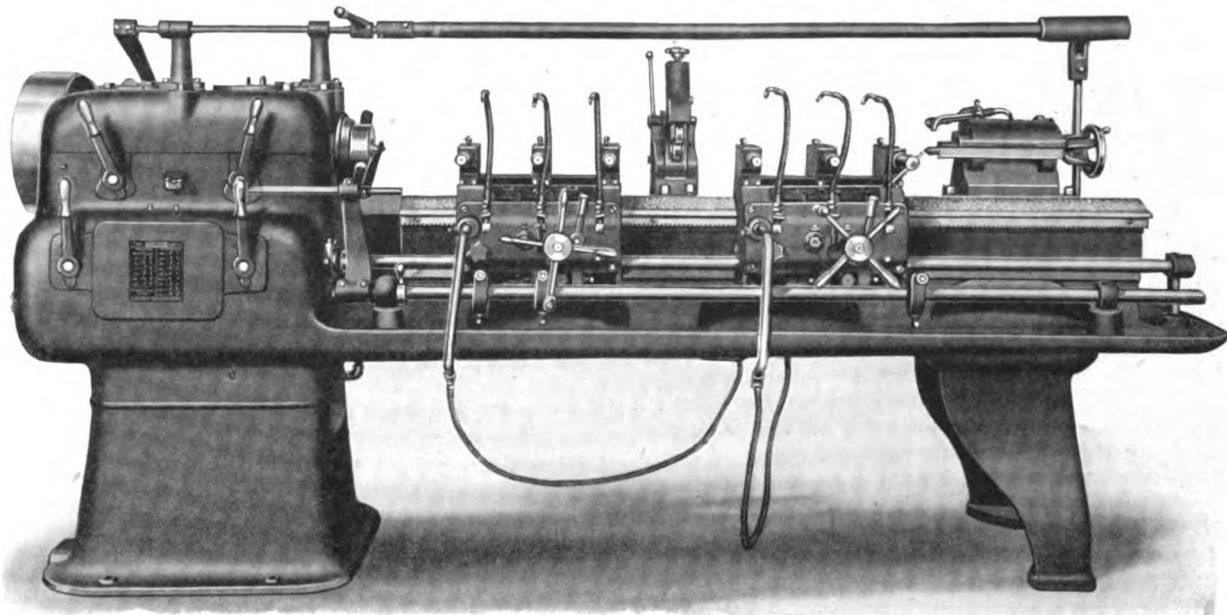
4" x 60" *So-swing* Lathe with Standard Equipment. Also Furnished in 4" x 84" and 4" x 108" as Required
